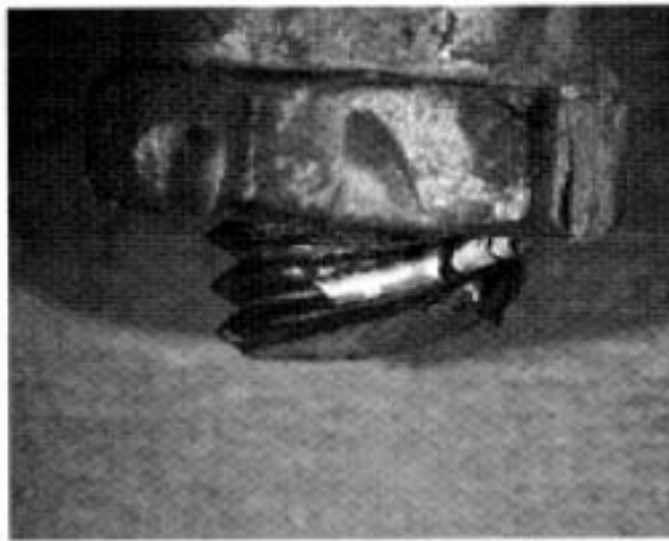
Close-up of bend in fractured rod (bend is inwards towards fuselage)
